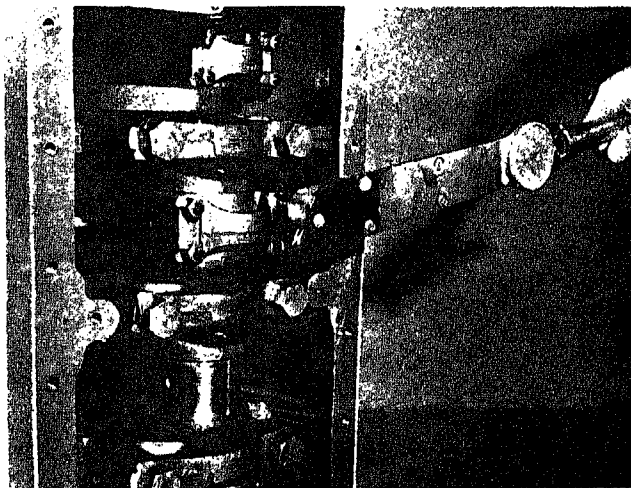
Torquing connecting rod "U" bolt nuts
